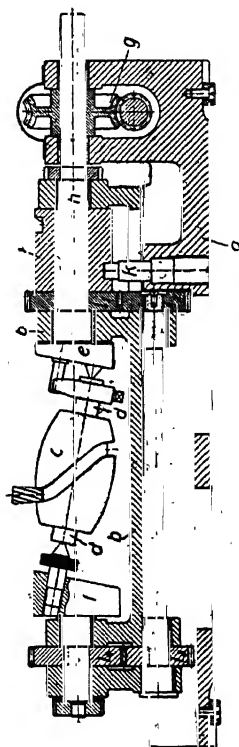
(Below).—Special attachment for milling a globe-shaped cam: *a*, base plate with slide in horizontal direction; *b*, upper slide; *c*, workpiece (globe-shaped cam); *d*, mandrel with dog; *e*, plate with eccentric center point and dog driver; *f*, plate with eccentric center point, slidable in axial direction; *g*, worm drive in base of *h*, shaft with axial slot; *i*, cam template mounted on *h*; *k*, tracer pin, stationary in base *a*; *l*, to *l*, gear reductions from *e* to *f*, ratio *L* to *l*.
